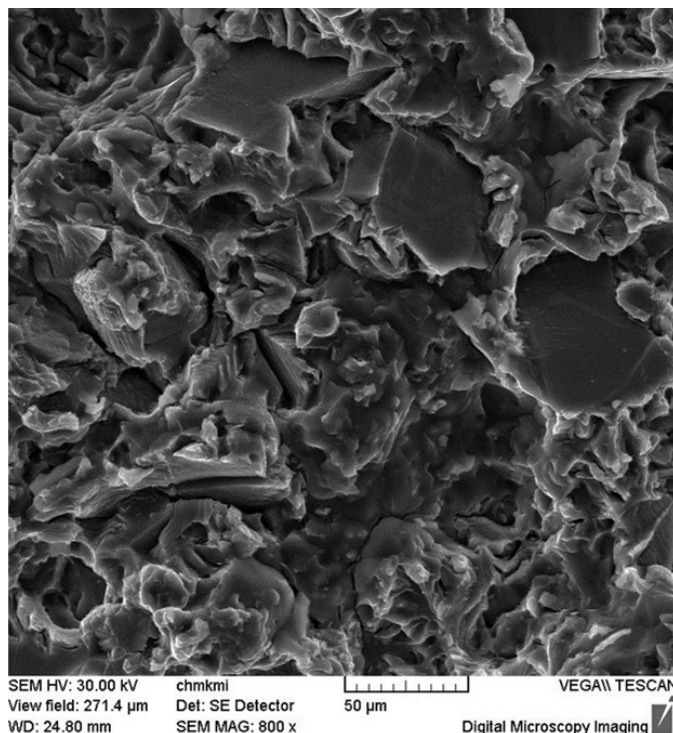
Fractography surface of aluminum alloy EN EC 51200 after three-point bending fatigue test, SEM – static part of fatigue fracture
